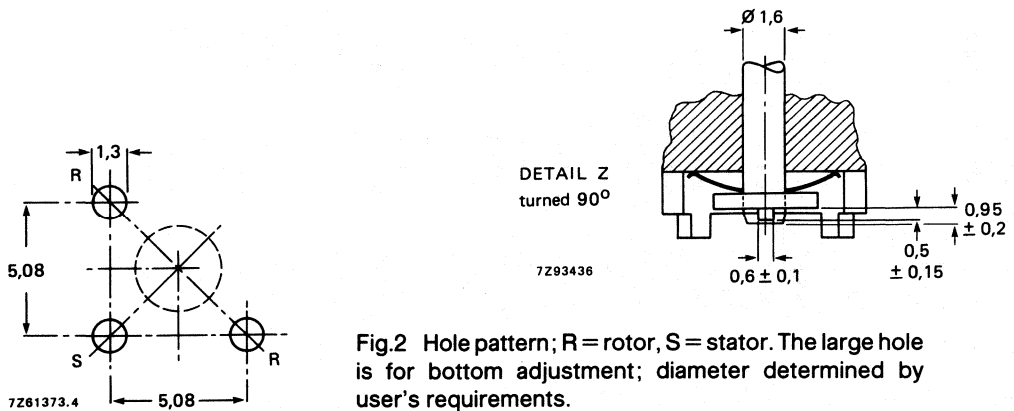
Hole pattern; R = rotor, S = stator. The large hole is for bottom adjustment; diameter determined by user's requirements.
